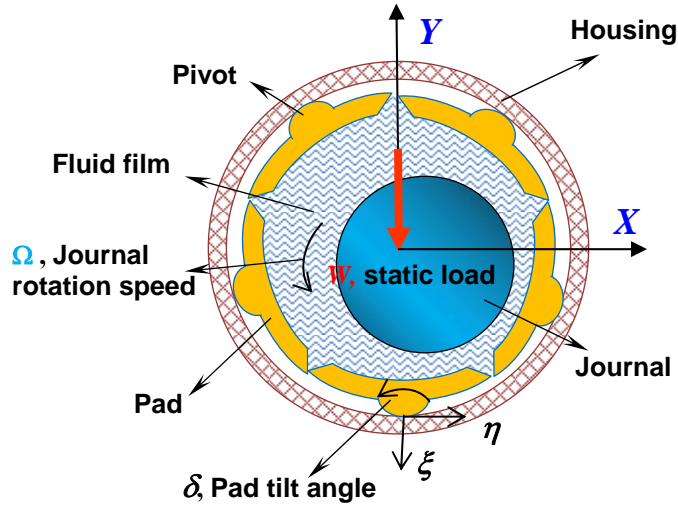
Schematic view of an ideal five-pad tilting pad bearing.
